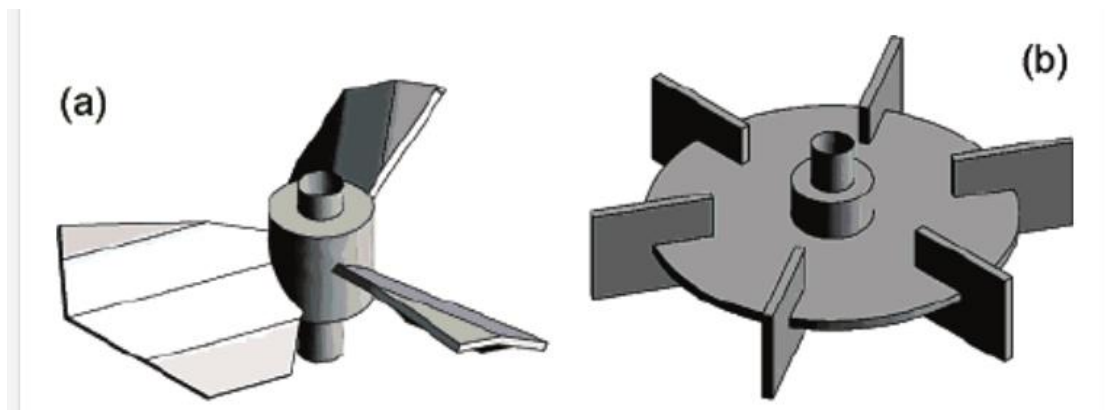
Impellers; a) Mixel TT; b) Rushton Turbine
